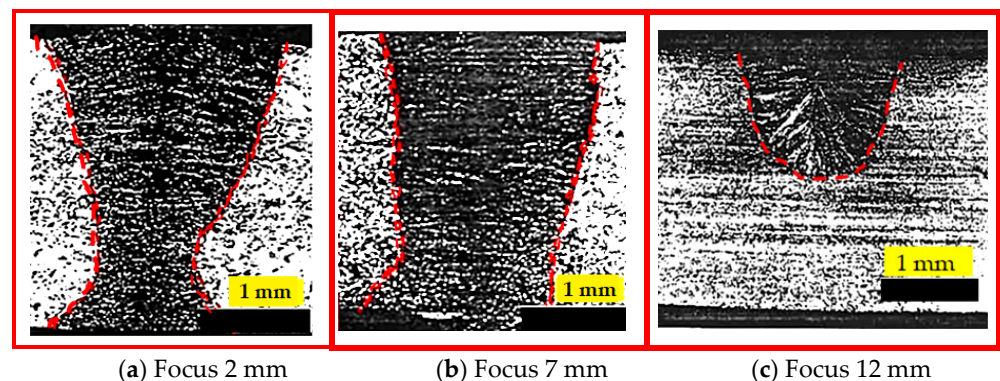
Effect of focus point on 304 HS laser weld carried out with a power 6 kw, welding speed 2.4 $\text{m}\cdot\text{min}^{-1}$, and shield gas comprising 70% He + 30% Ar.
